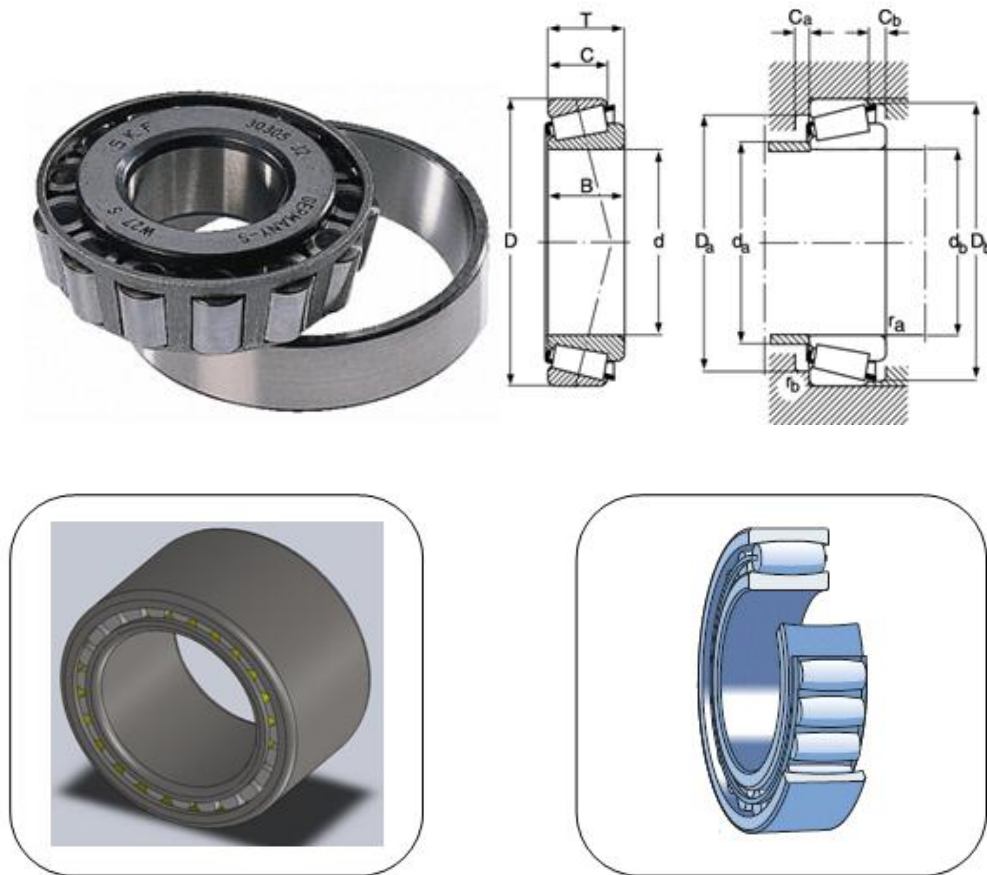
DIFFERNTTYPES OF BEARINGS
